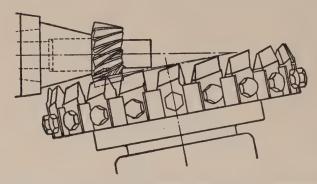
Circular Type Cutter Employed in Generating Spiral Beyel and Hypoid Gears.
